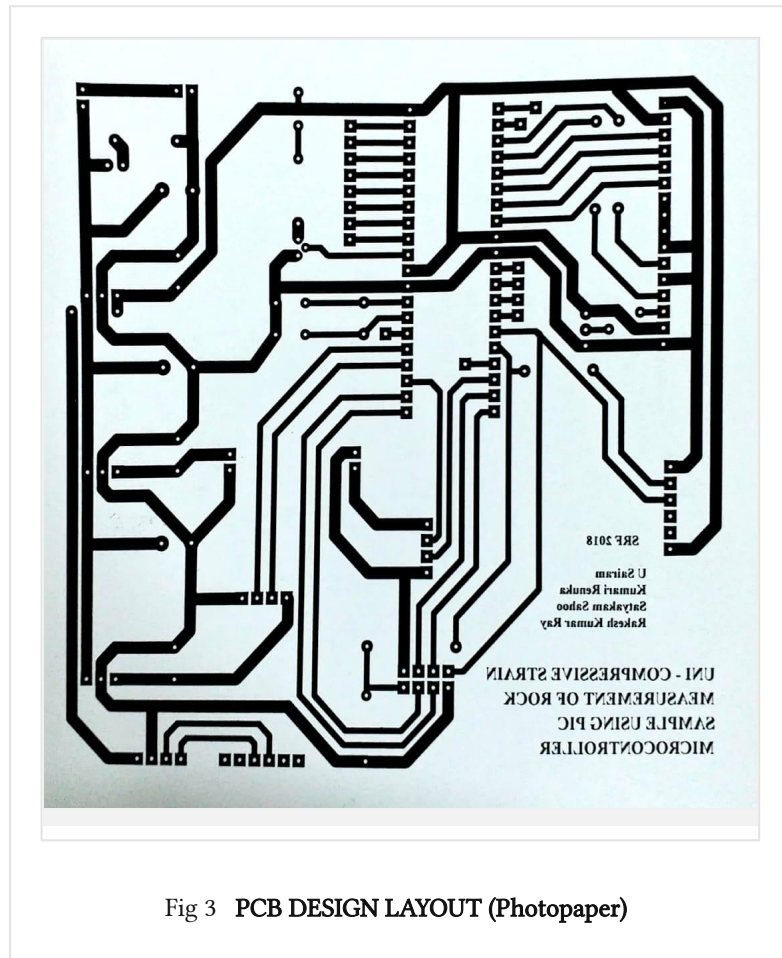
PCB DESIGN LAYOUT (Photopaper)
